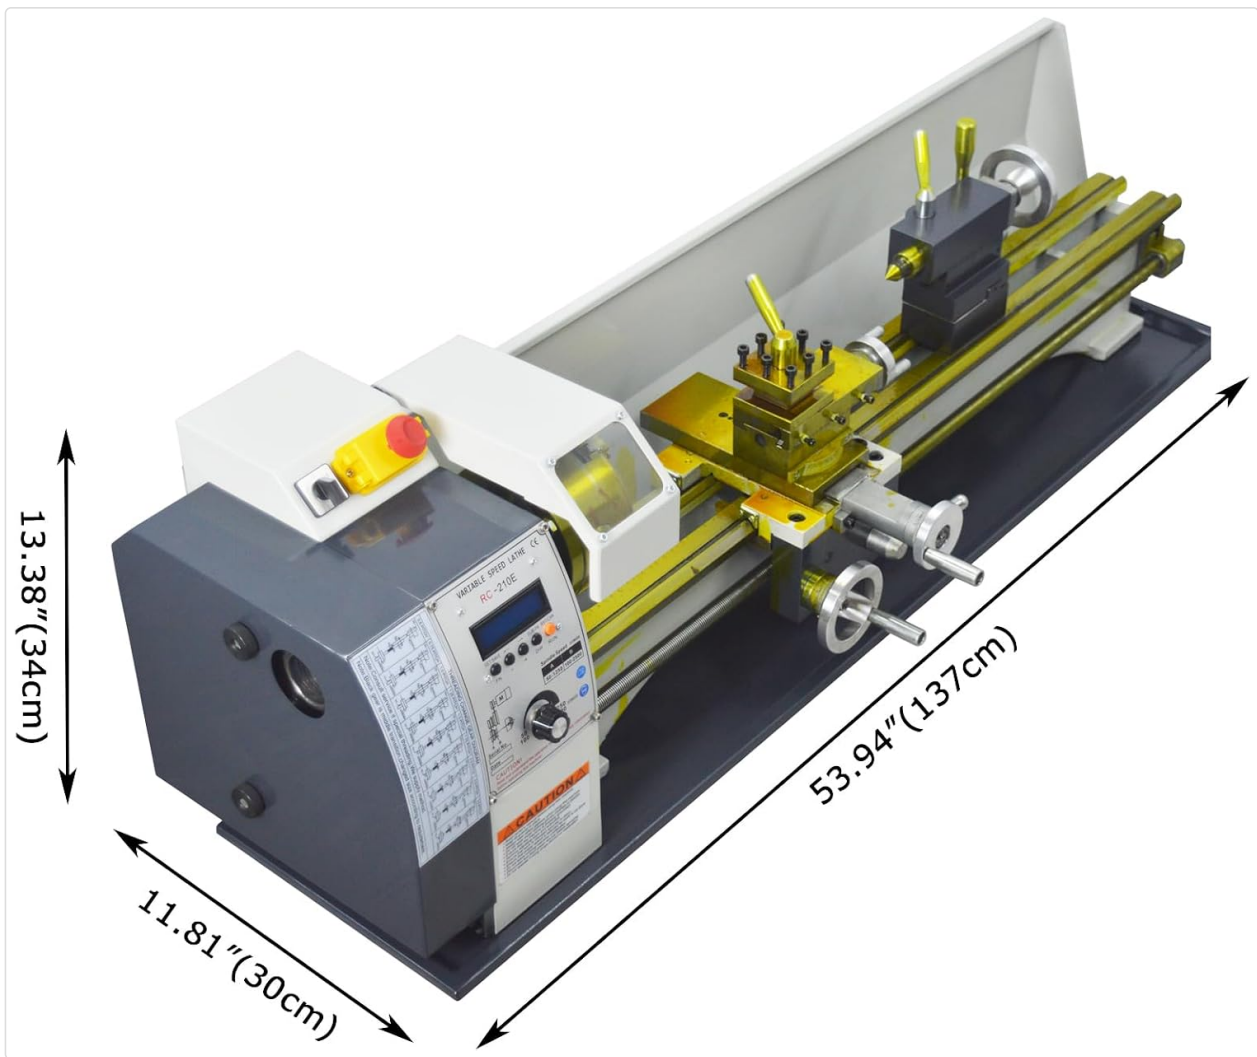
Overall view of the Banfluxion RC-210E Precision Metal Bench Lathe, showing its dimensions of approximately 53.94 inches (137 cm) in length, 11.81 inches (30 cm) in width, and 13.38 inches (34 cm) in height.
